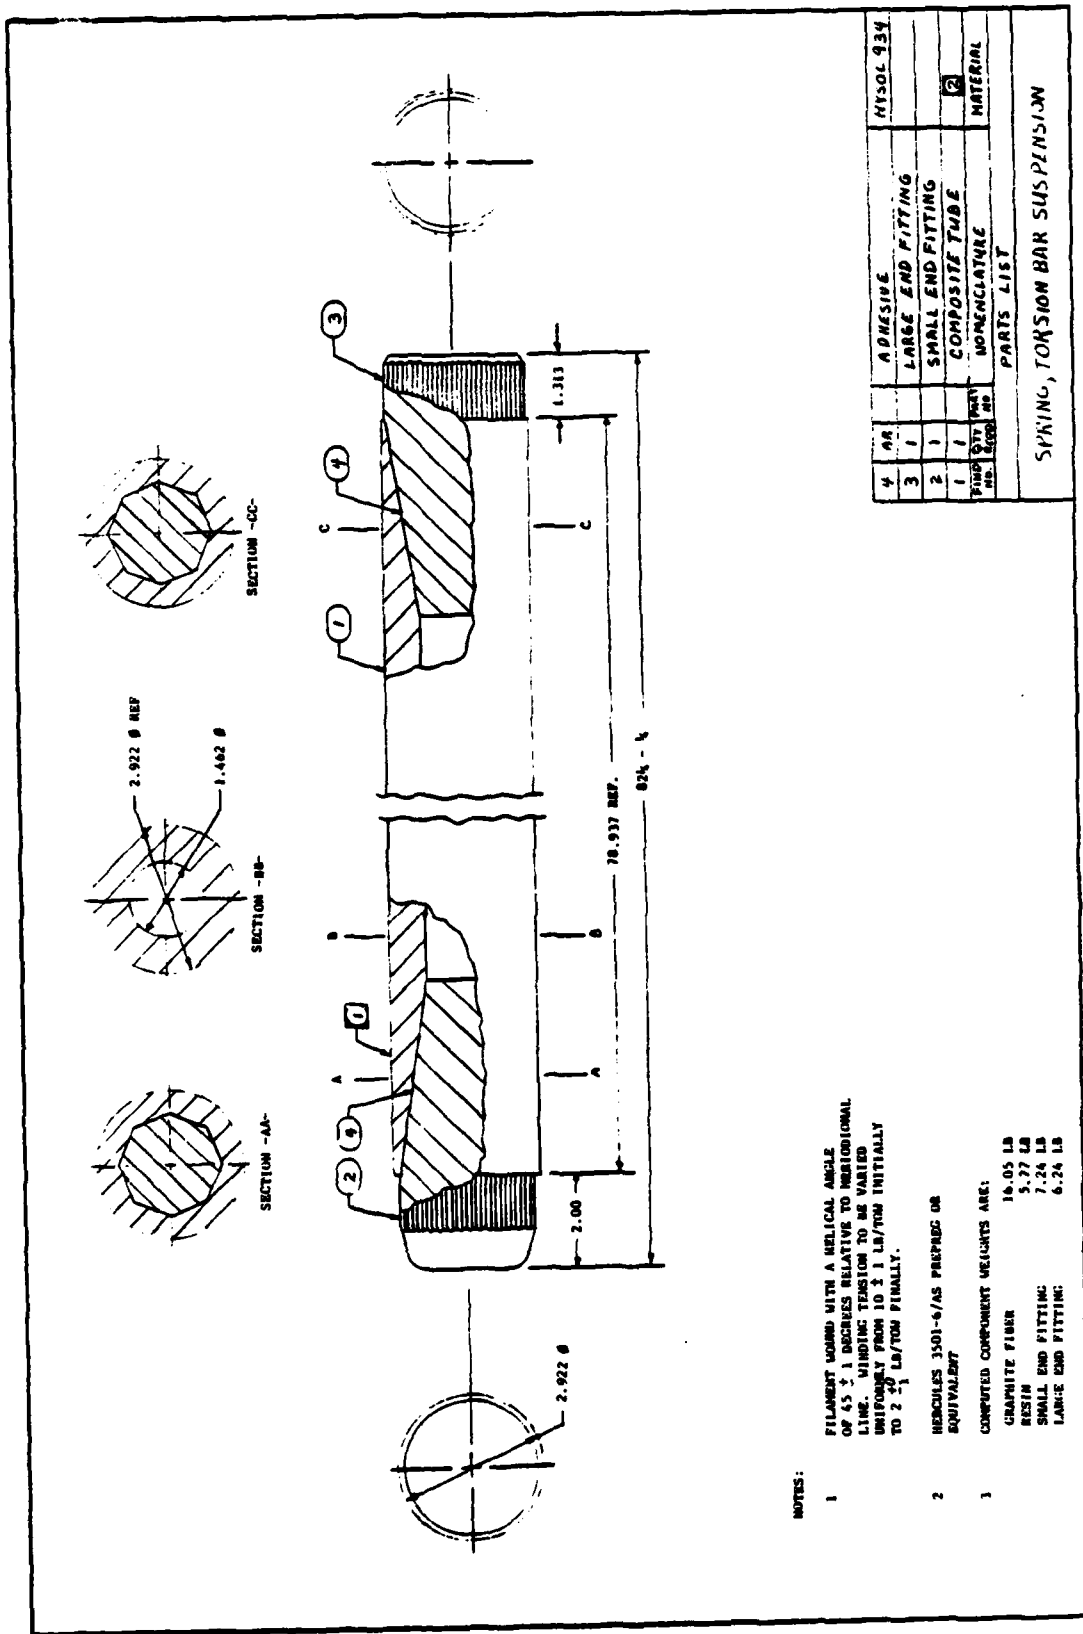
Engineering Sketch of Composite Torsion Bar Suspension Spring
